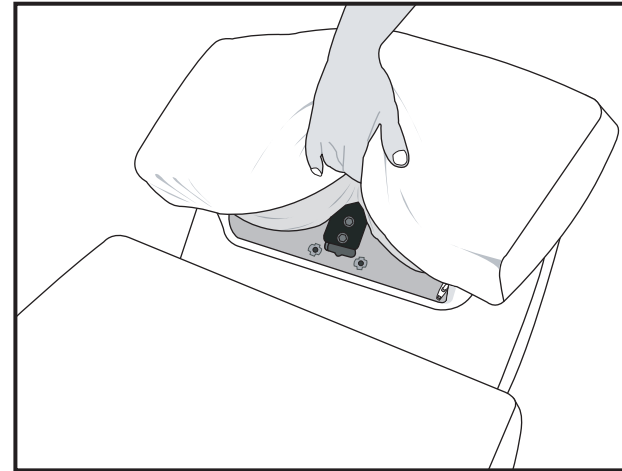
Each arm is attached to the chassis by 6 bolts that require a 7/16" socket and ratchet. Remove these bolt to detach the arm from the chassis.
